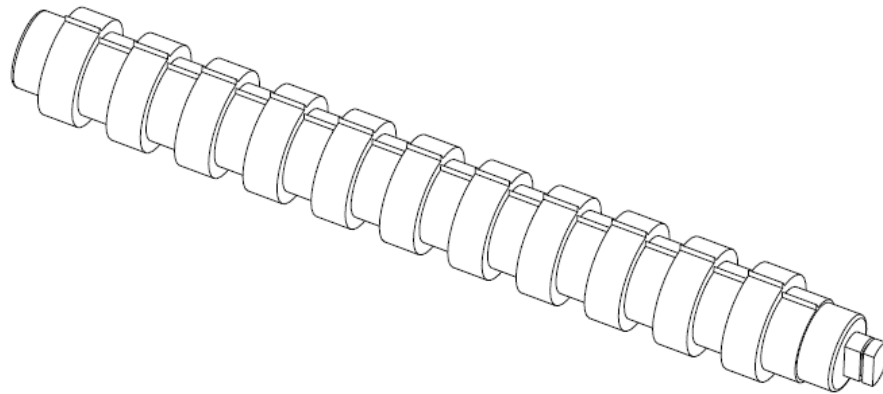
Isometric view of the 60mm chinchin cutting shaft
